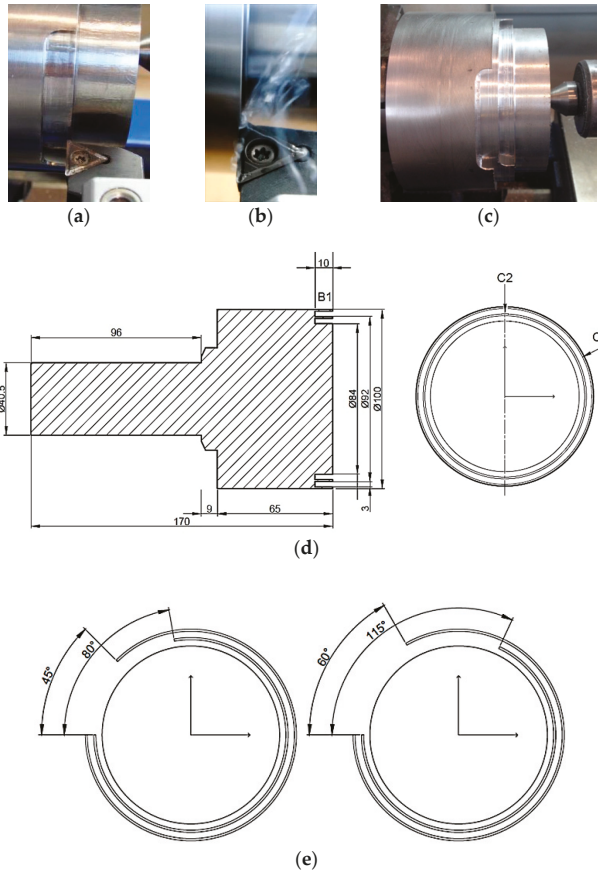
(a) Orthogonal cutting disposition; (b) initial machining instance; (c) sample for several cutting tests; (d) test sample design (mm); (e) relief zone design.
